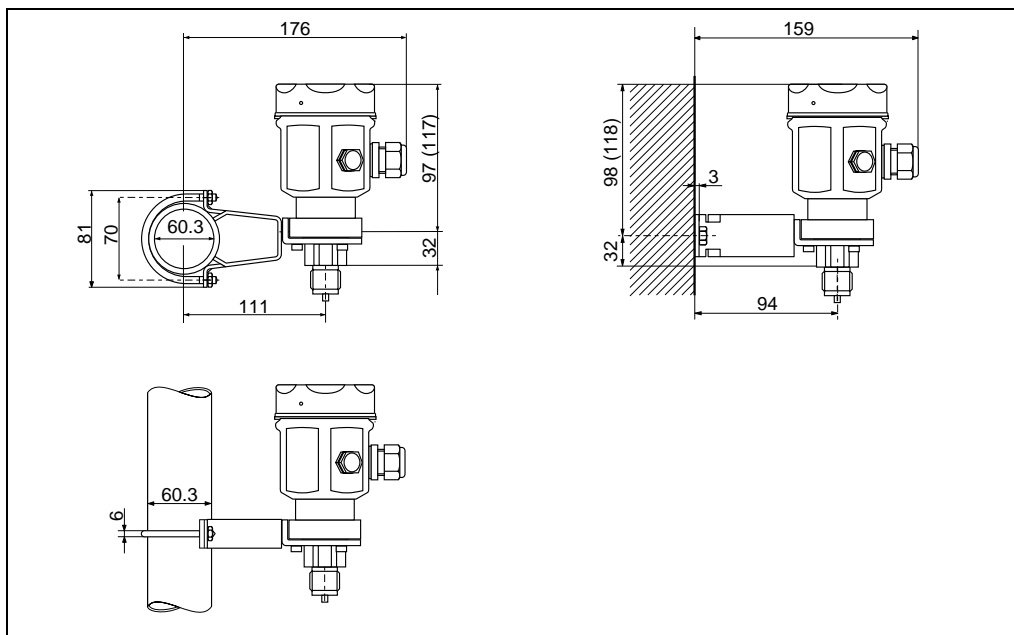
left: Mounting with bracket on a vertical pipe
